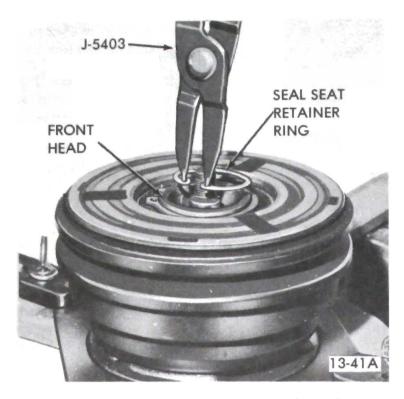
Removing or Installing Shaft Seal Seat Retaining Ring
